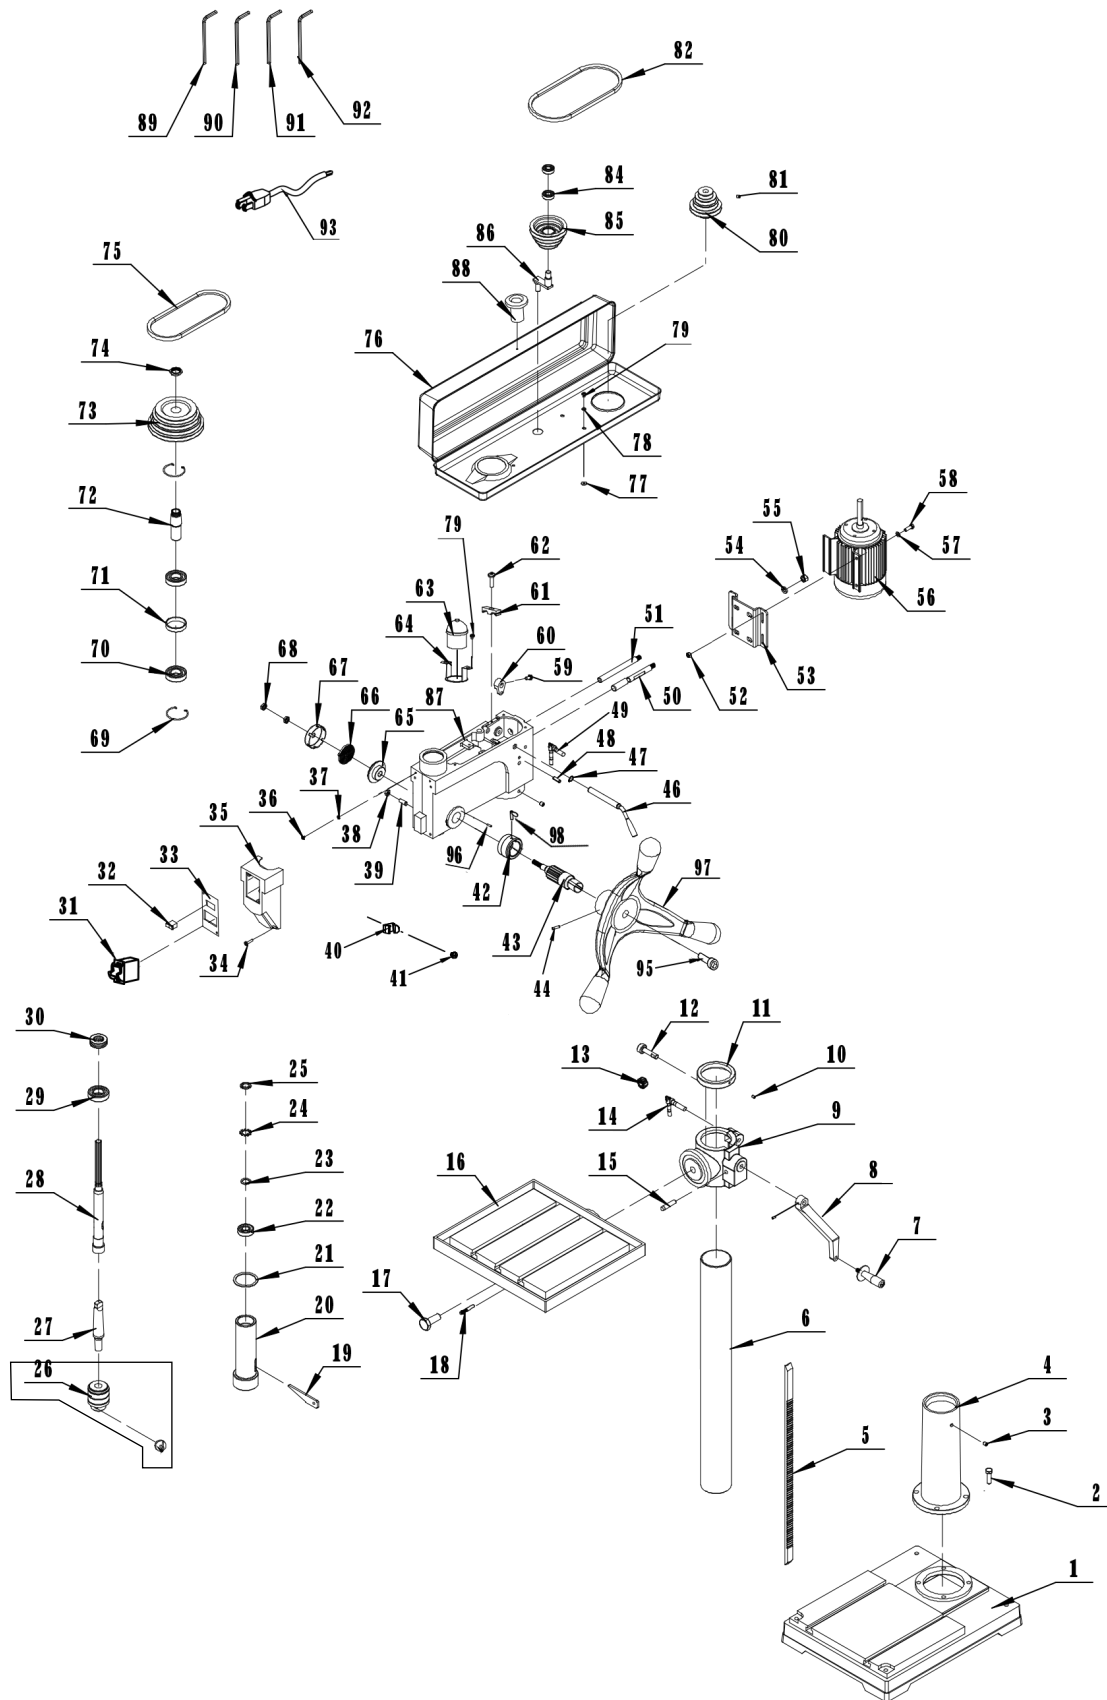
Parts illustration for 20" Floor Model Drill Press.
